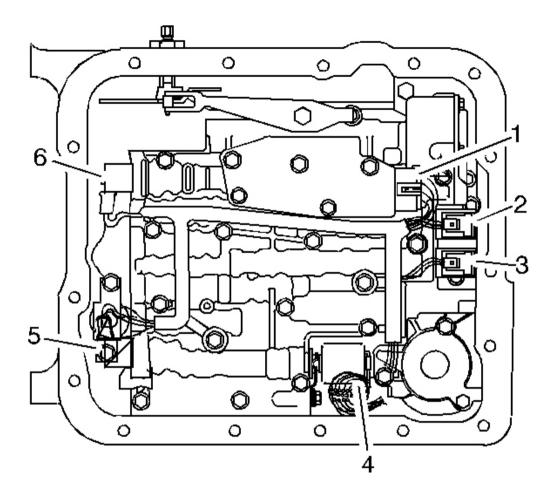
Identifying Valve Body Electrical Connections Courtesy of GENERAL MOTORS CORP.
